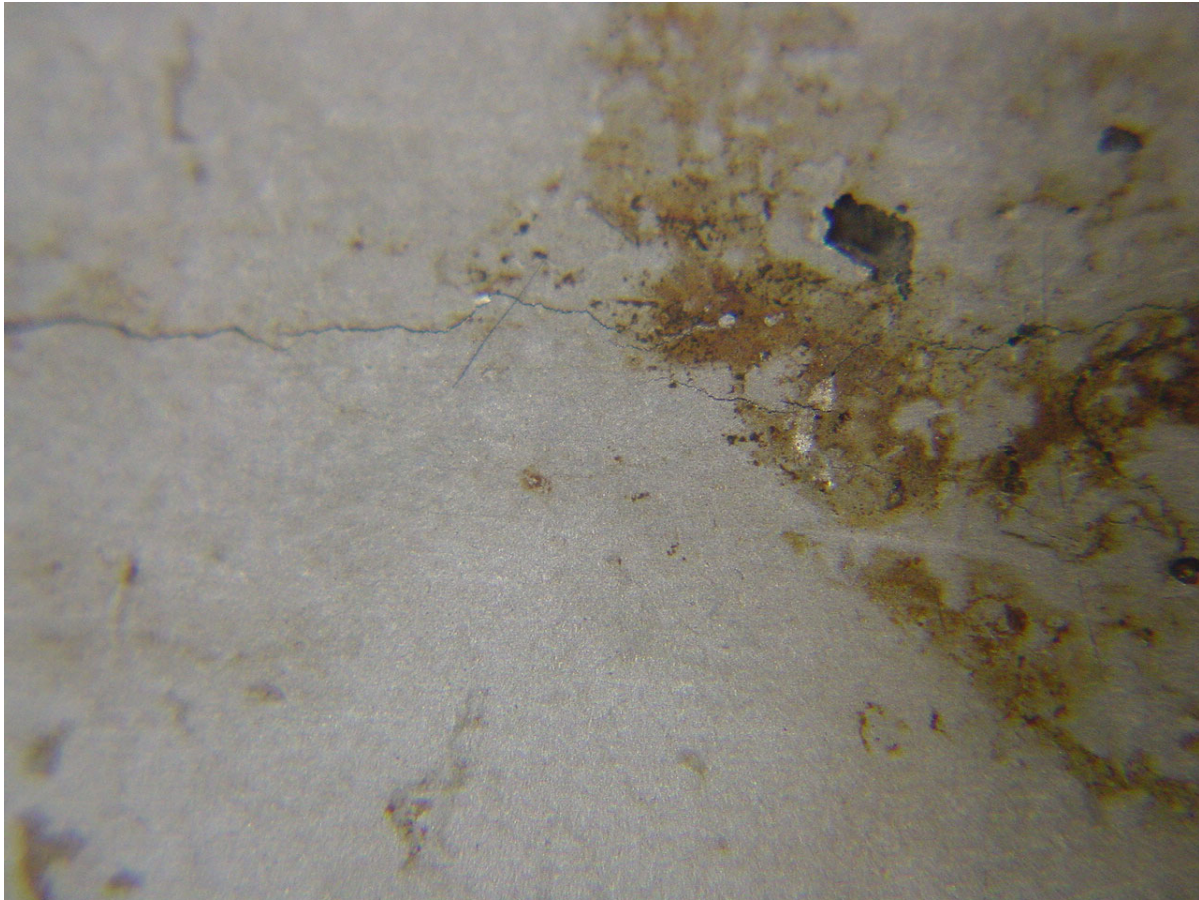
Closer view of localized corrosion of coupon in Figure 6 showing pits and cracks.
